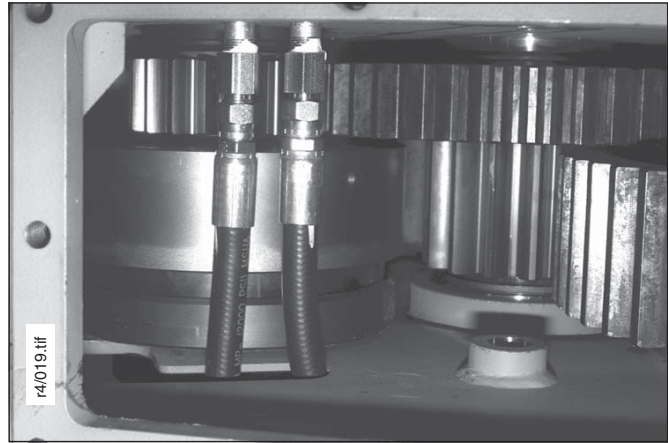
shows the location of clutch shaft components. It will be easiest to perform steps 1 - 11 below with the winch upright (or still installed on the tractor). Prior to step 12, you may rotate the winch so that the right side is up.
